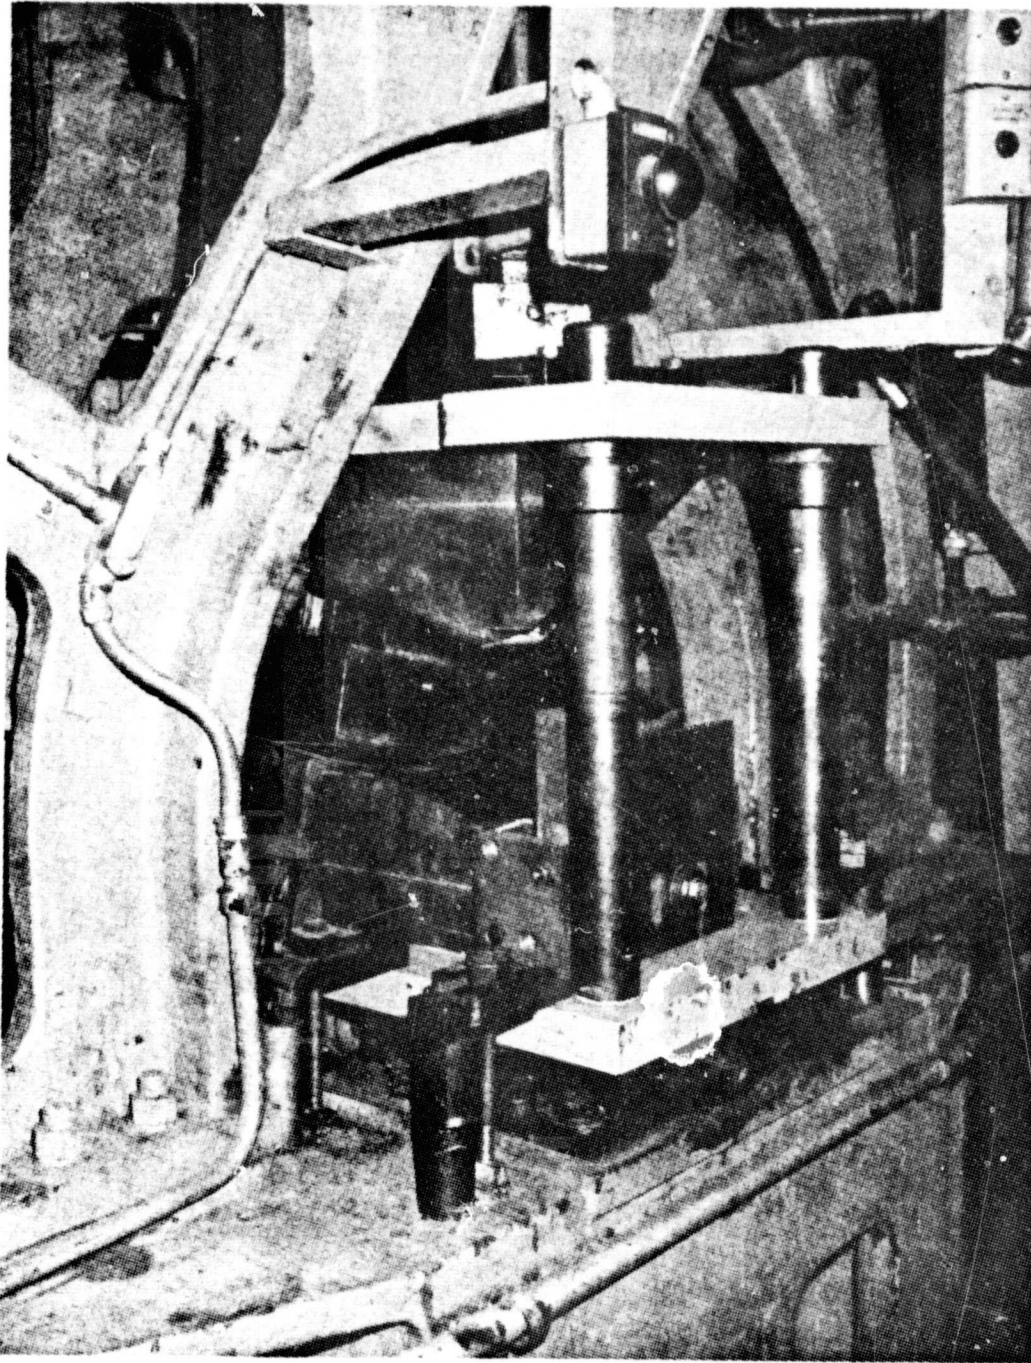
Twist Tooling Shown Installed in Ajax Crank Press Twister. Root and Center Section Dies Shown.
